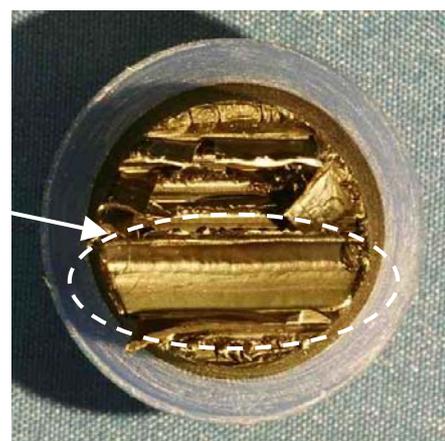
Fig.IX Fracture surface of tensile creep test specimen containing a void.
